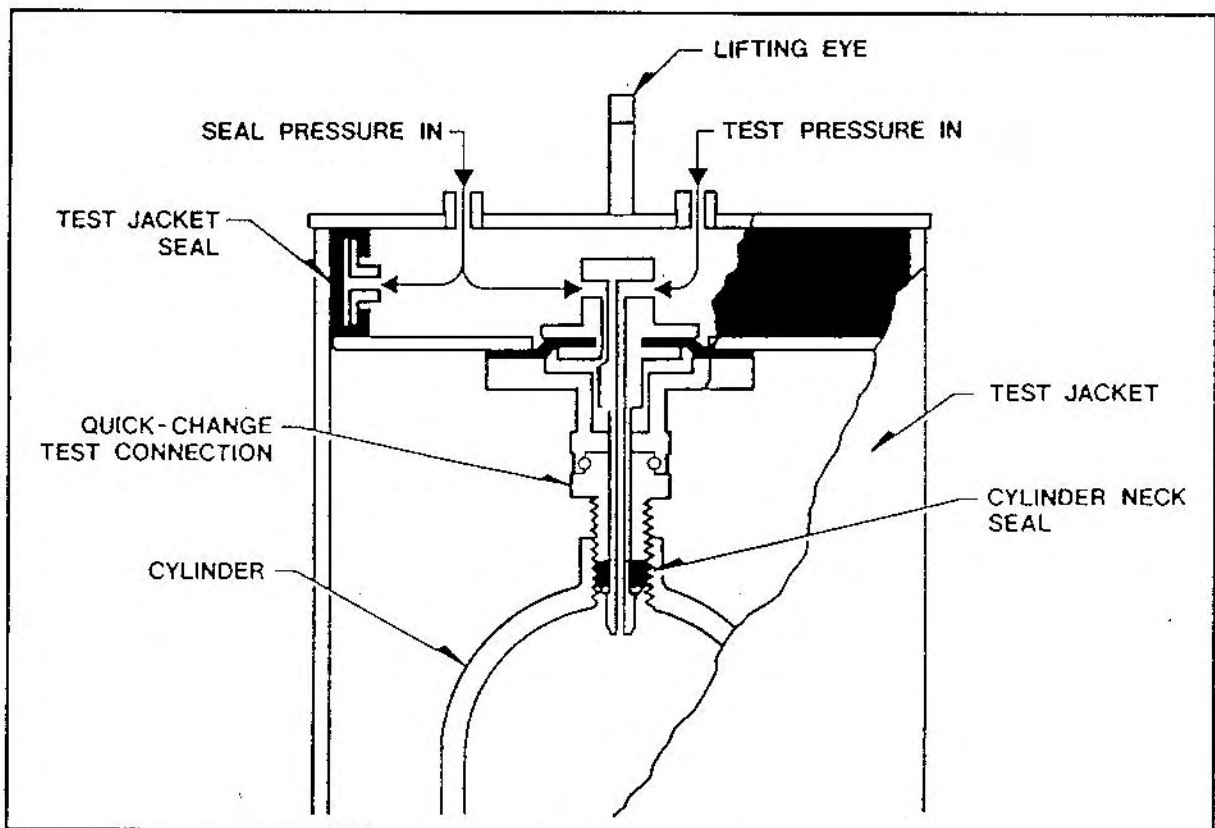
HYDRACLOSE TEST HEAD, CROSS SECTION
